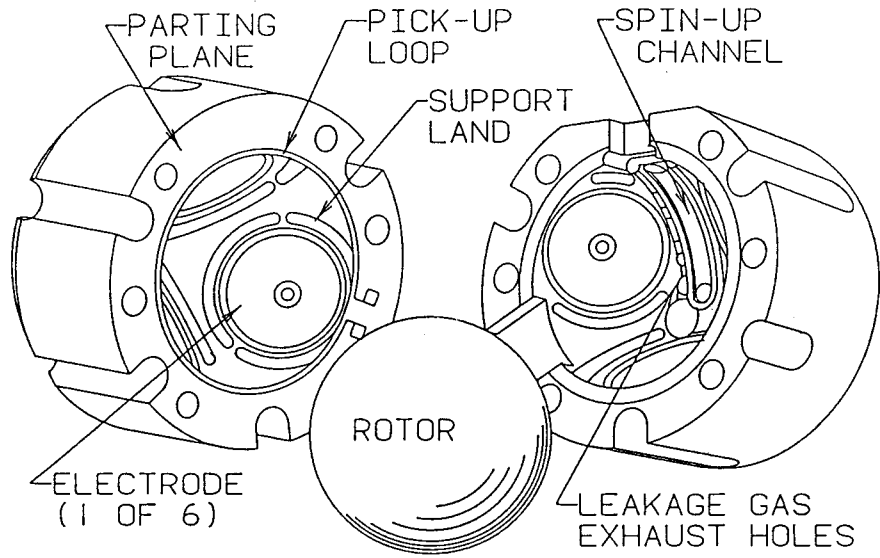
Exploded view of gyroscope rotor and housing. The rotor is coated with 2.5 μm of Nb.
